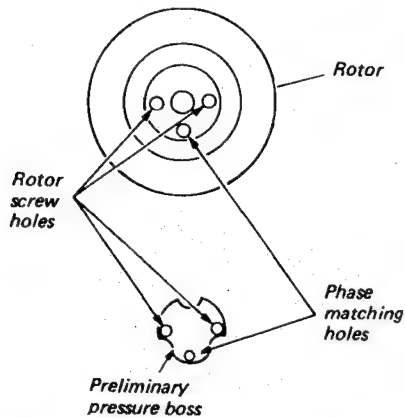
Phase matching between rotor and preliminary pressure boss
